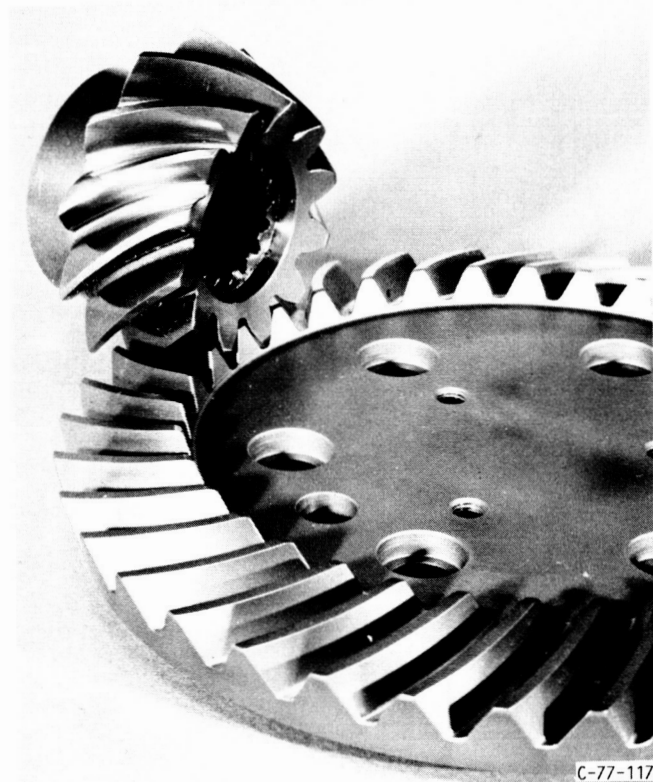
NASA LEWIS BEVEL GEAR APPARATUS TEST GEARS.
